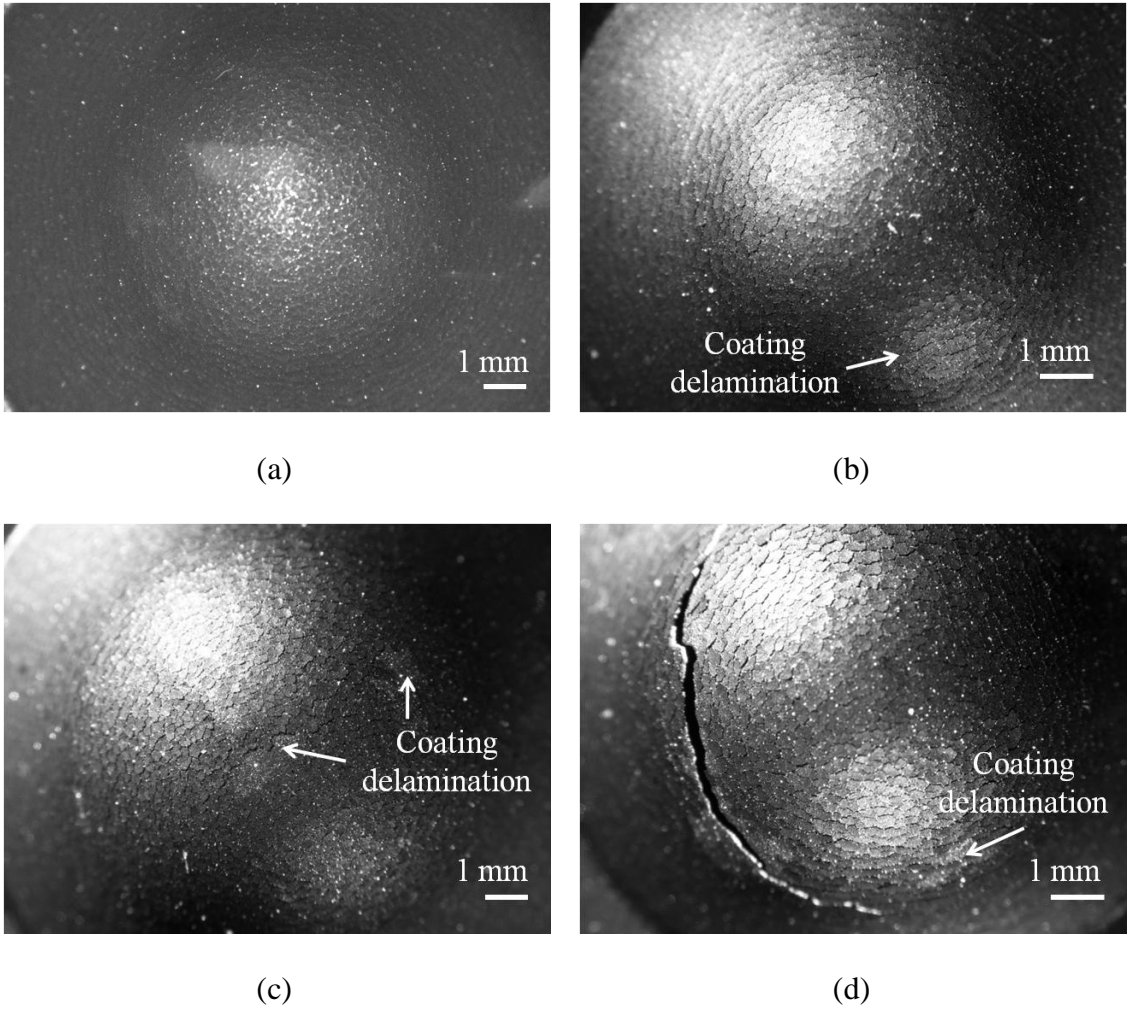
Optical micrographs of the outer coated surfaces of the specimens after ball punch deformation tests with a penetrator displacement of (a) 3.5 mm, (b) 3.6 mm, (c) 4.0 mm and (d) 4.85 mm.
